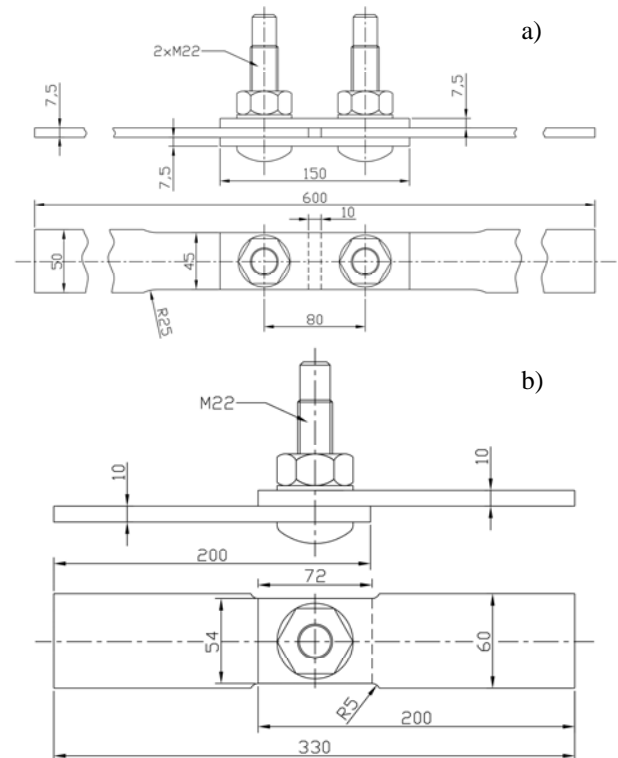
Geometry of the bolted joints considered in this study: a) double shear connection; b) single shear connection (dimensions in mm)
